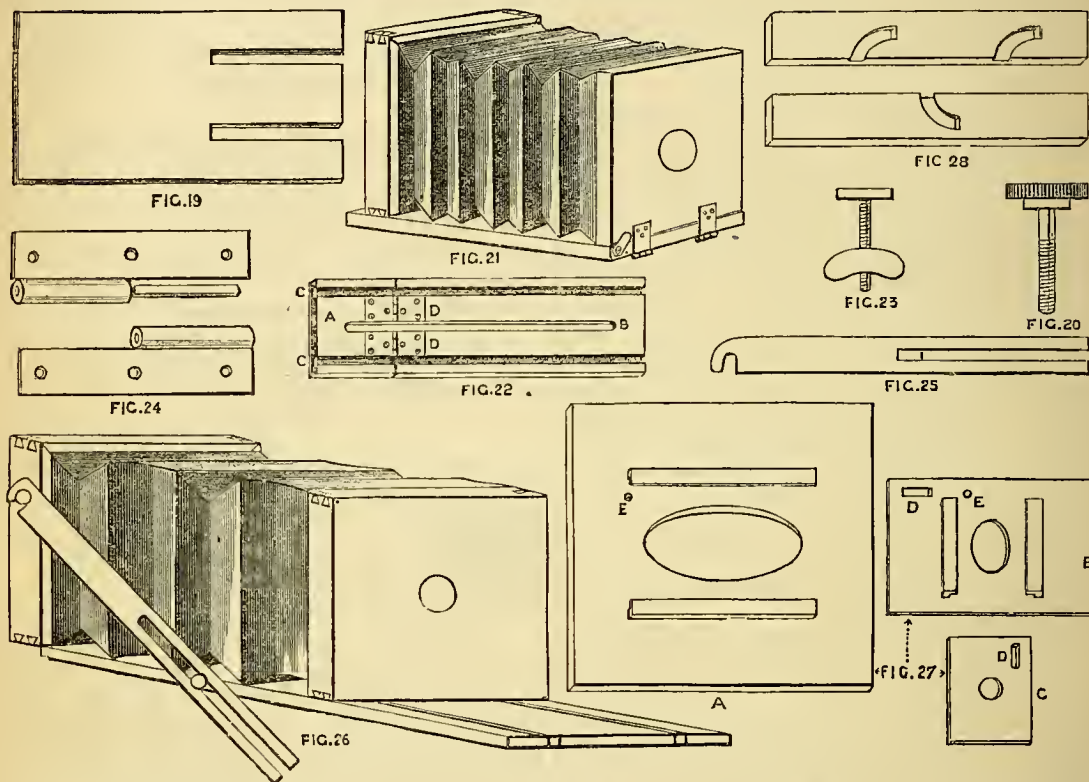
BASE BOARD. FIG. 20.—SCREW. FIG. 21.—CAMERA, WITH FRONT KEPT UP BY BUTTON. FIG. 22.—ALTERNATIVE CONSTRUCTION OF BASE. FIG. 23.—SCREW FOR TAIL-PIECE. FIG. 24.—DETACHABLE HINGE. FIG. 25.—STRIP OF BRASS TO KEEP BACK IN POSITION. FIG. 26.—CAMERA KEPT OPEN BY STRIP OF BRASS. FIG. 27.—RISING FRONT. FIG. 28.—SLOTS IN CAMERA FOR DARK SLIDES.
